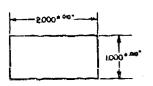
THERMAL-EXPANSION SPECIMEN
